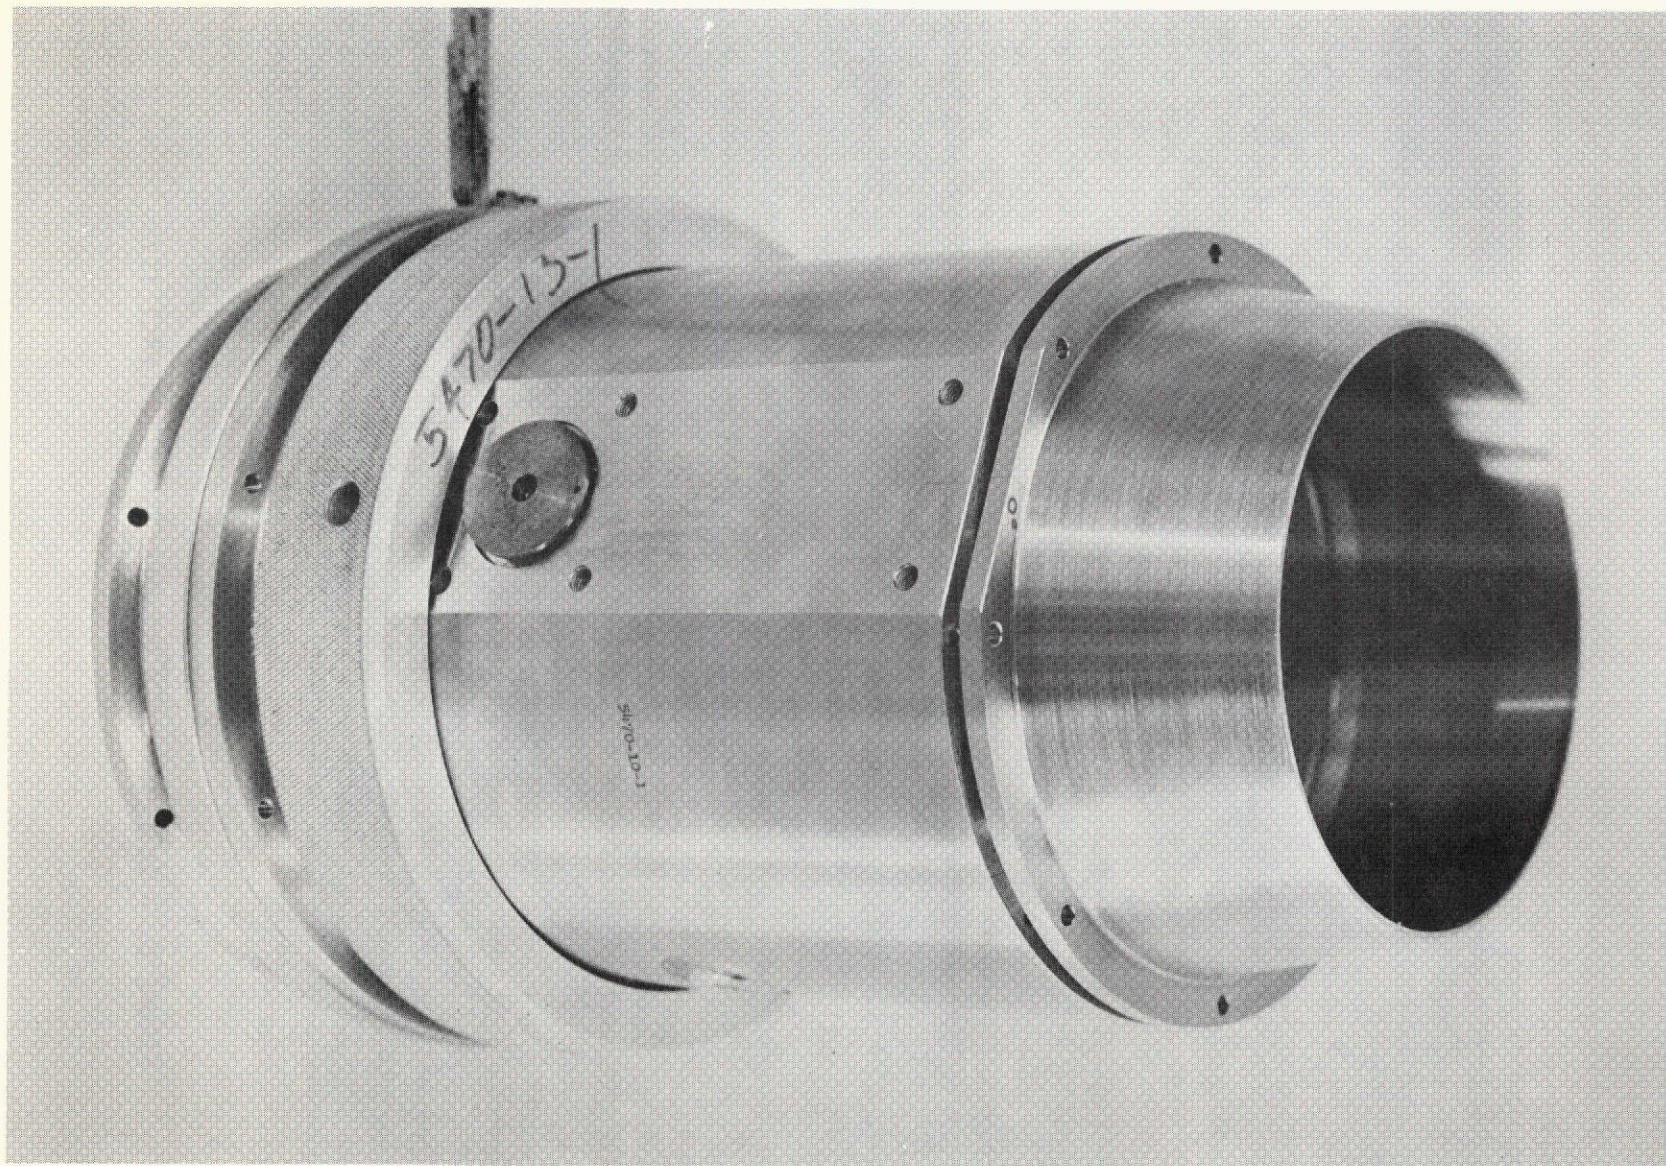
TYPICAL TEST NOZZLE, ASSEMBLED
